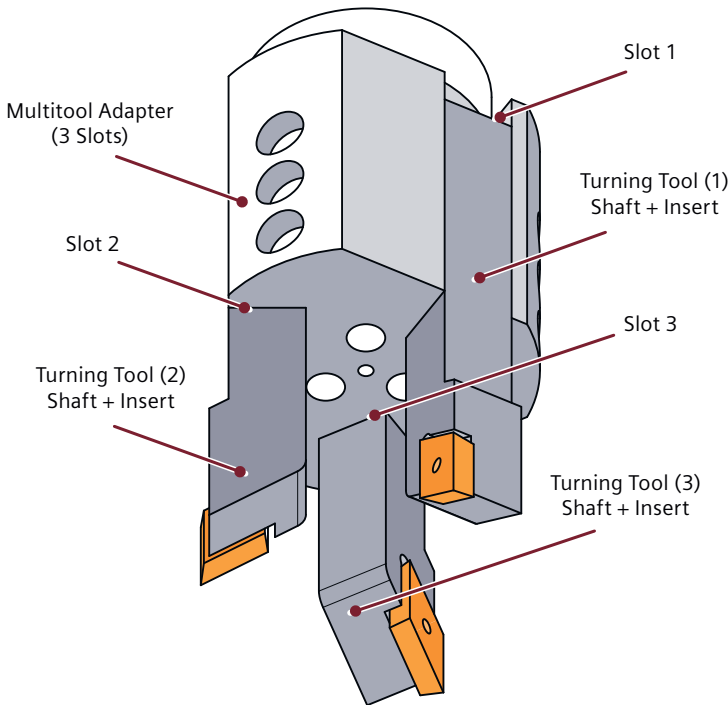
Example: Multitool adapter with 3 slots for turning tools
